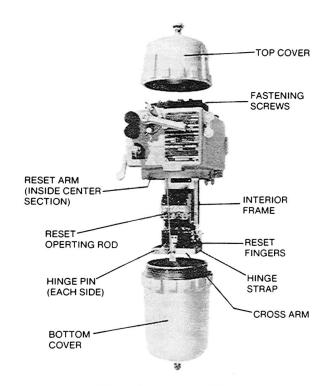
Separated View Shown with Breather & Drain Option Installed.
